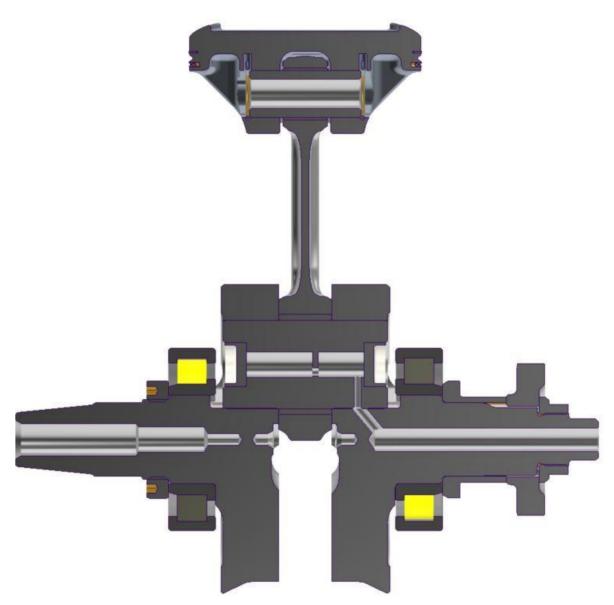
SECTION VIEW OF CRANK MECHANISM
